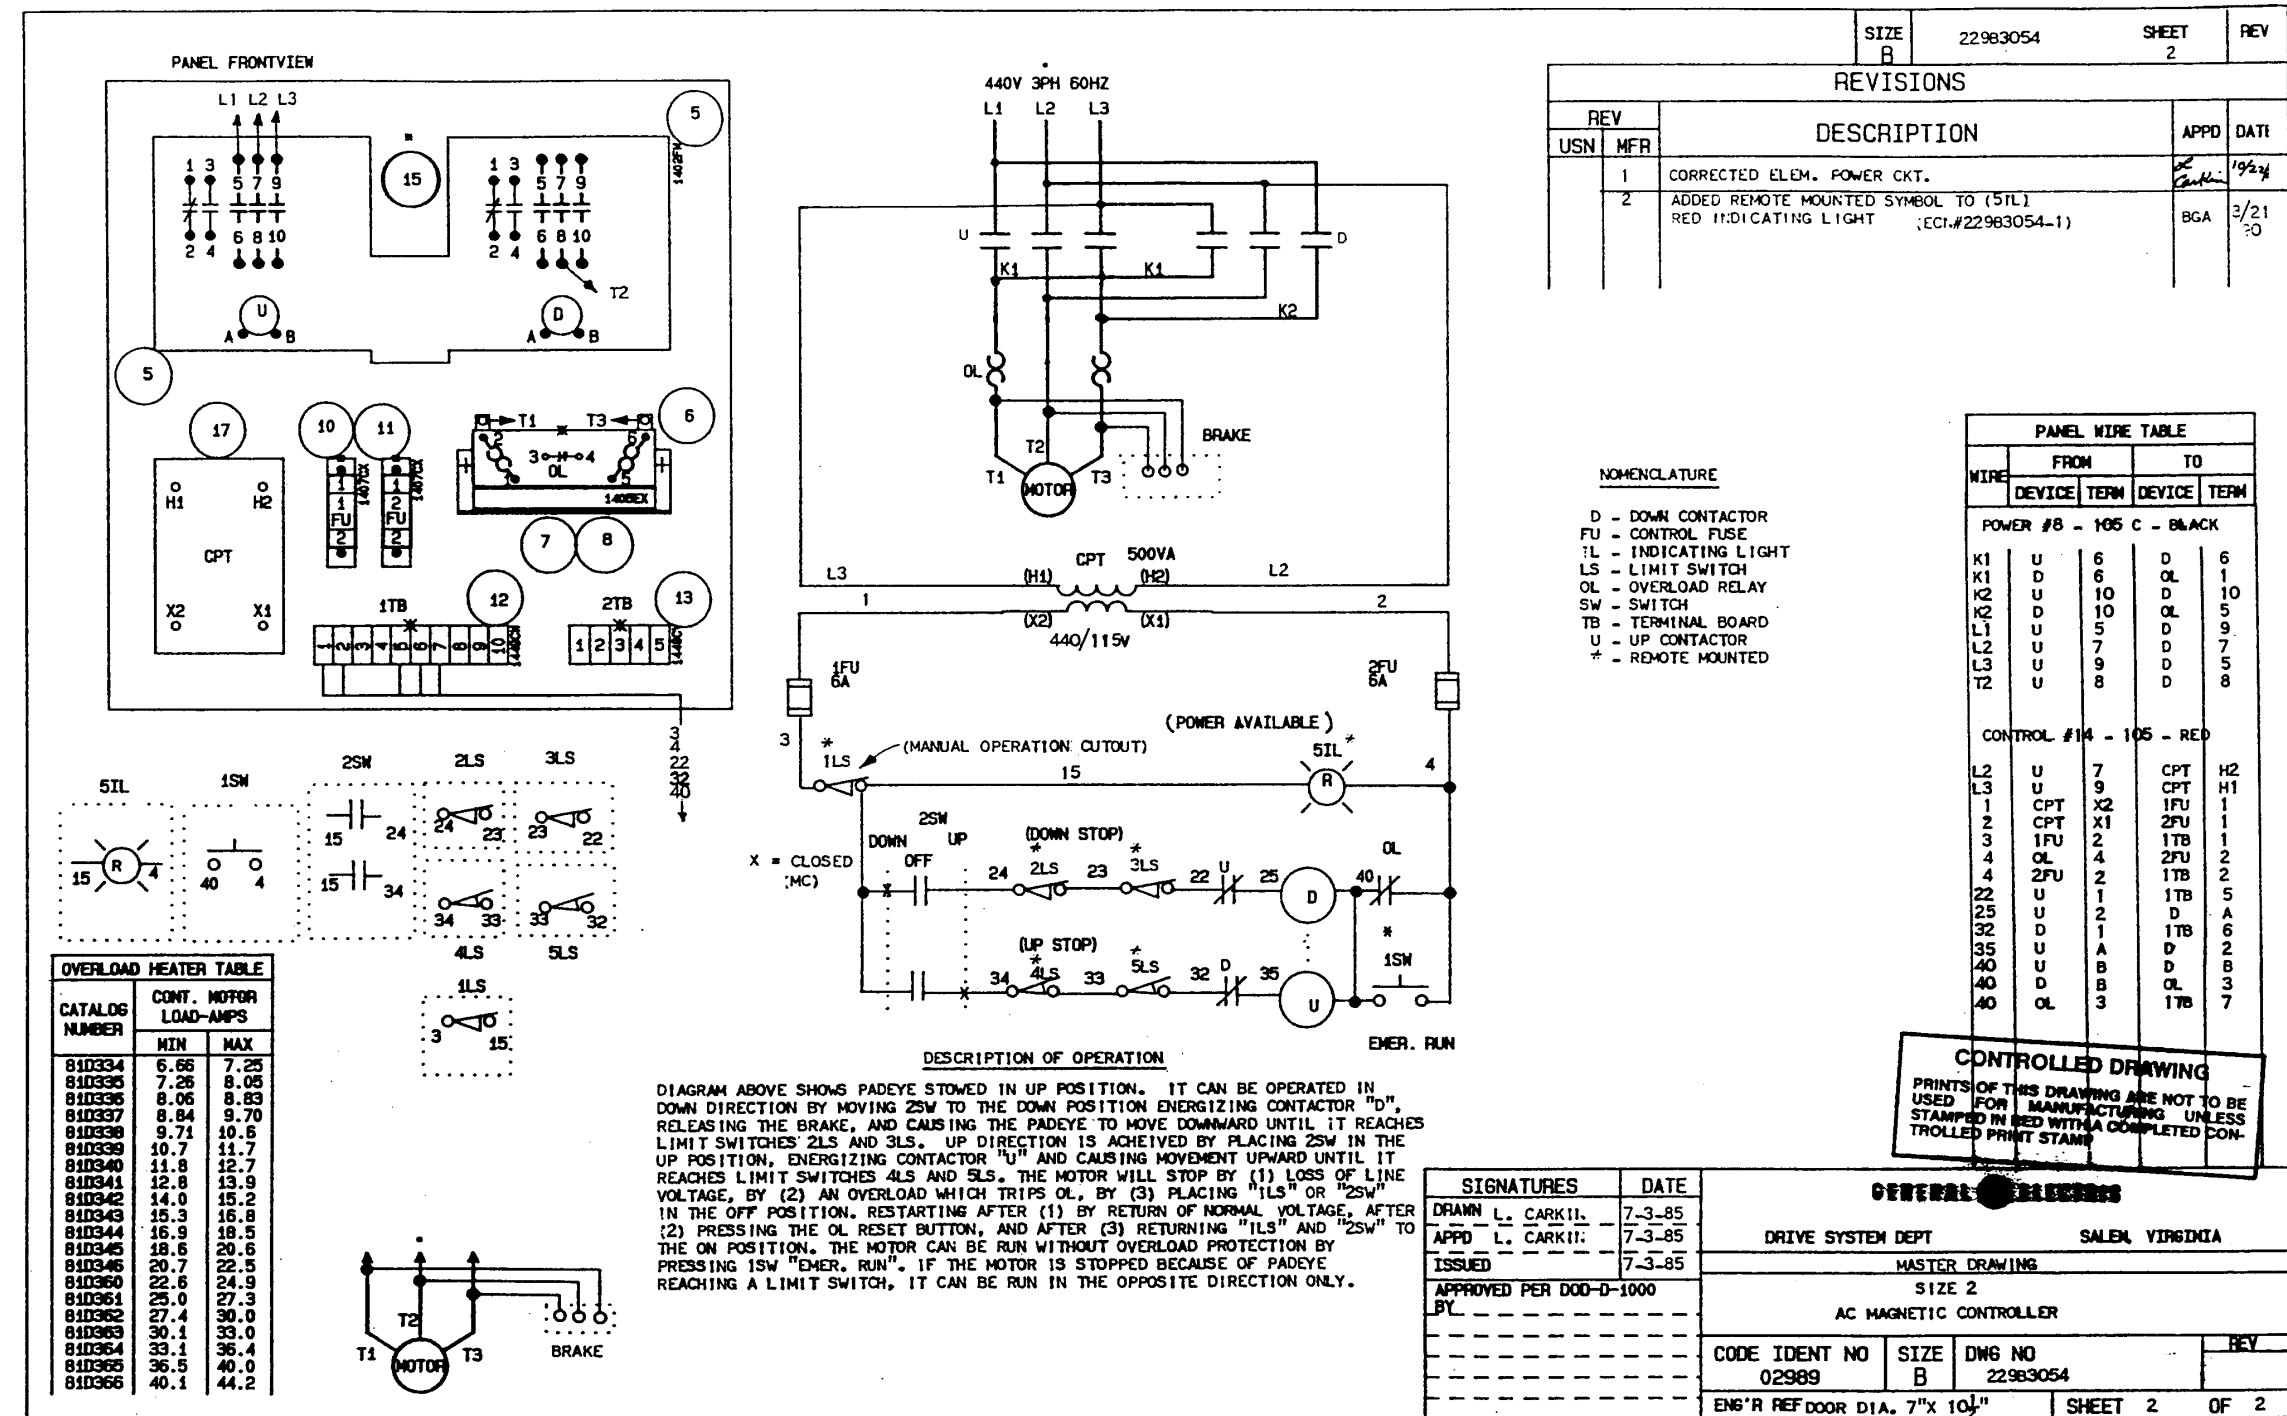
Motor Controller, Dwg. No. 229B3054 (Sheet 2 of 2)
